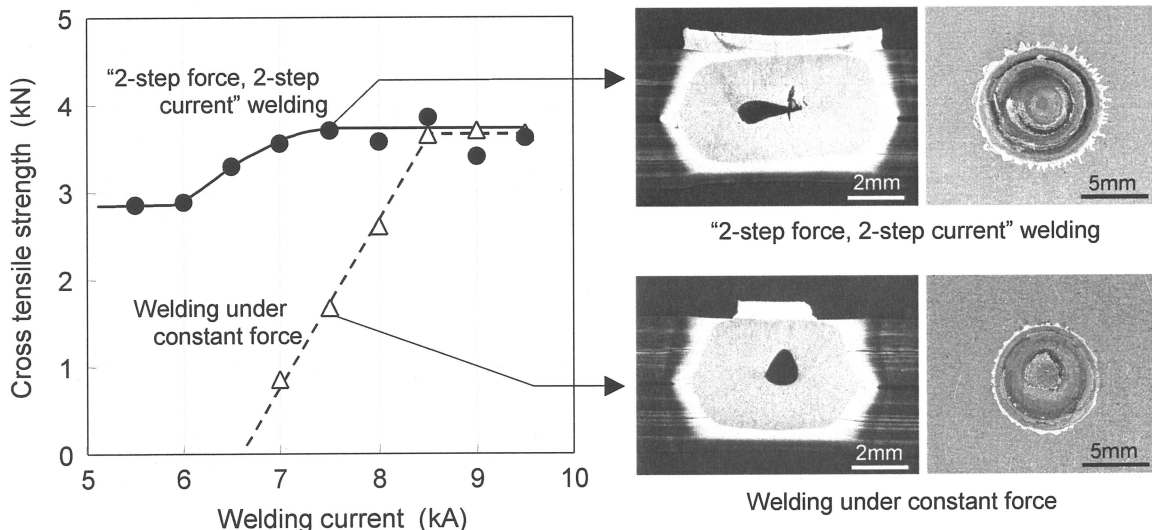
Cross tensile strength between thin sheet and thick sheet, cross-sectional macros and weld appearances after tensile test of resistance spot weld of three sheet joint (sheet joint: 0.7mmt+2.3mmt+2.3mmt; sheet thickness ratio: 7.6).
